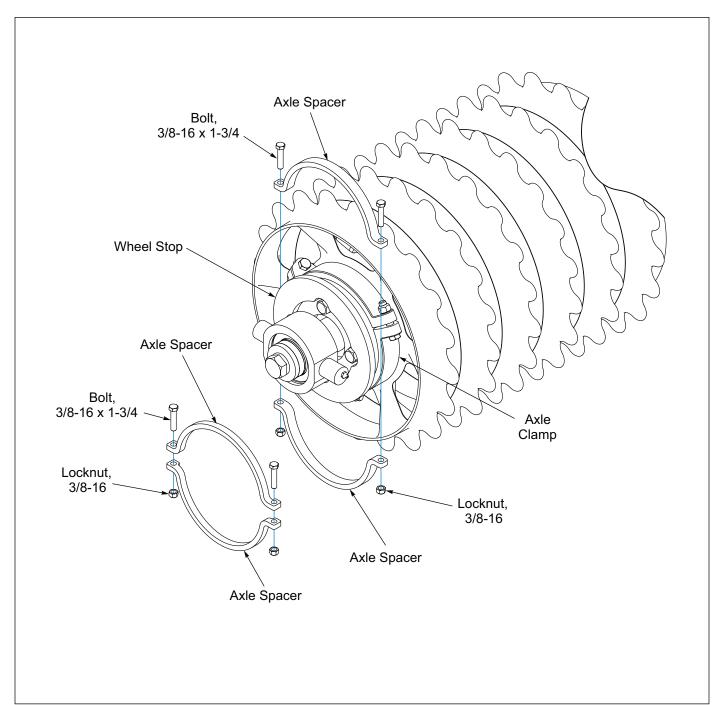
Clamp End Spacer Kit (1 of 2) - Optional
